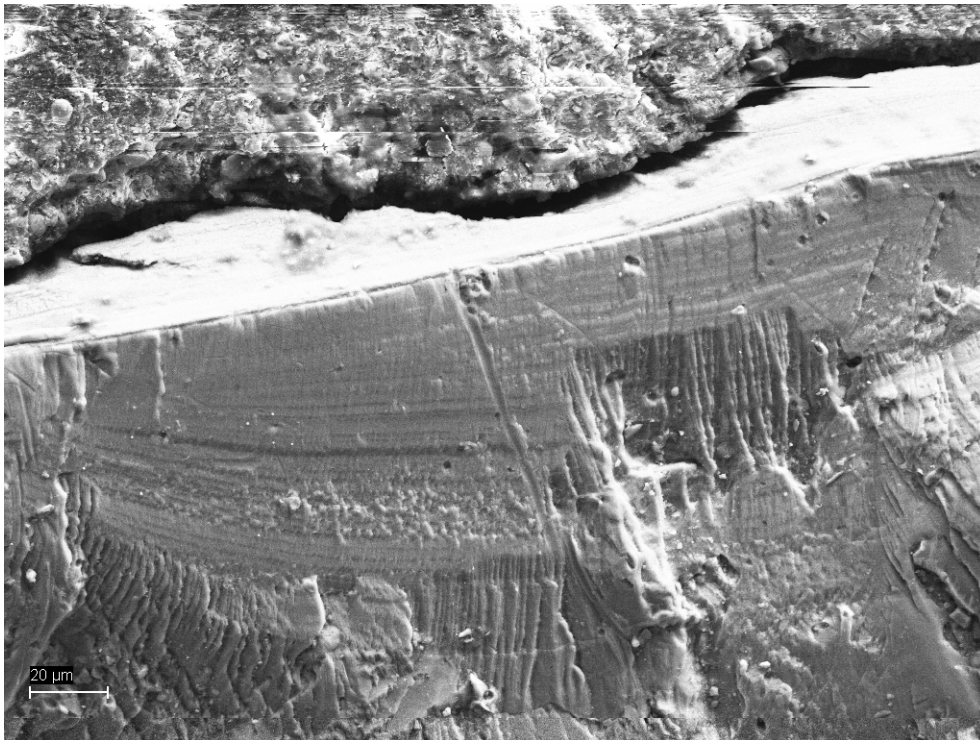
Right fatigue fracture (Image 4) in detail
